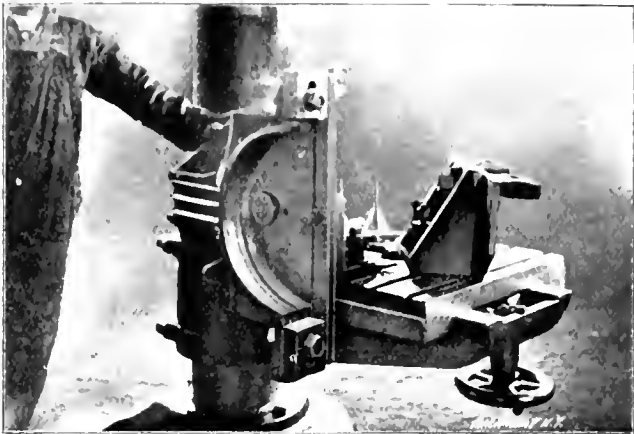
Indexing Fixture for Holding Eccentric Straps while Drilling Oil and Set-screw Holes
